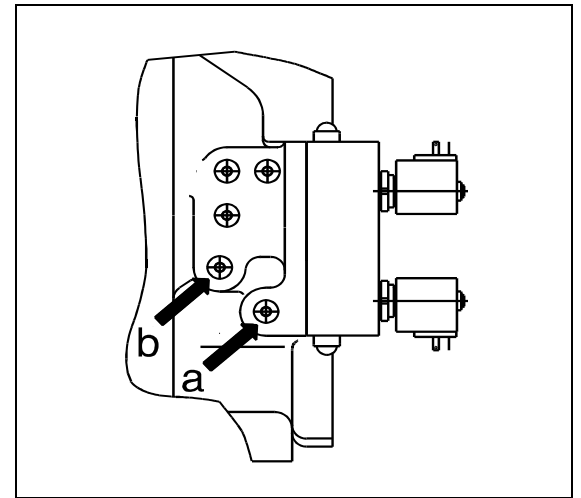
Arrangement of the screw plugs in the hydraulic spaces of the capacity control
